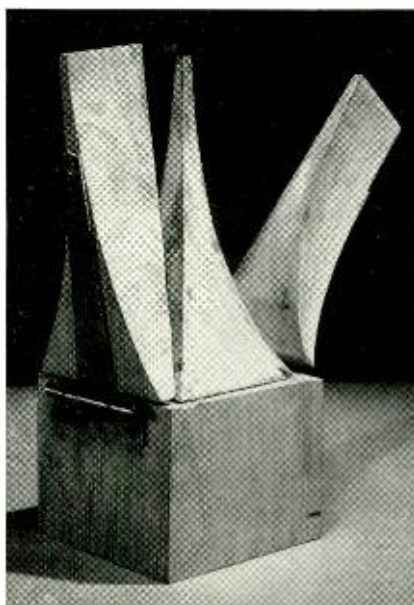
Wood forming block used for shaping and soldering the individual horn sections to uniform dimensions.
